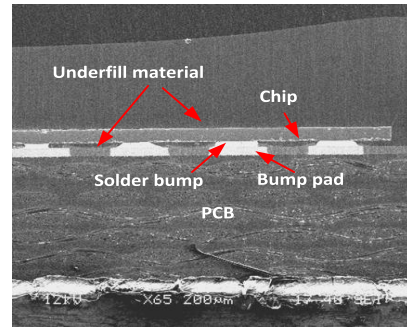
SEM picture of the crosssection of the embedded ultrathin stress sensor chip in the drop impact test board.
